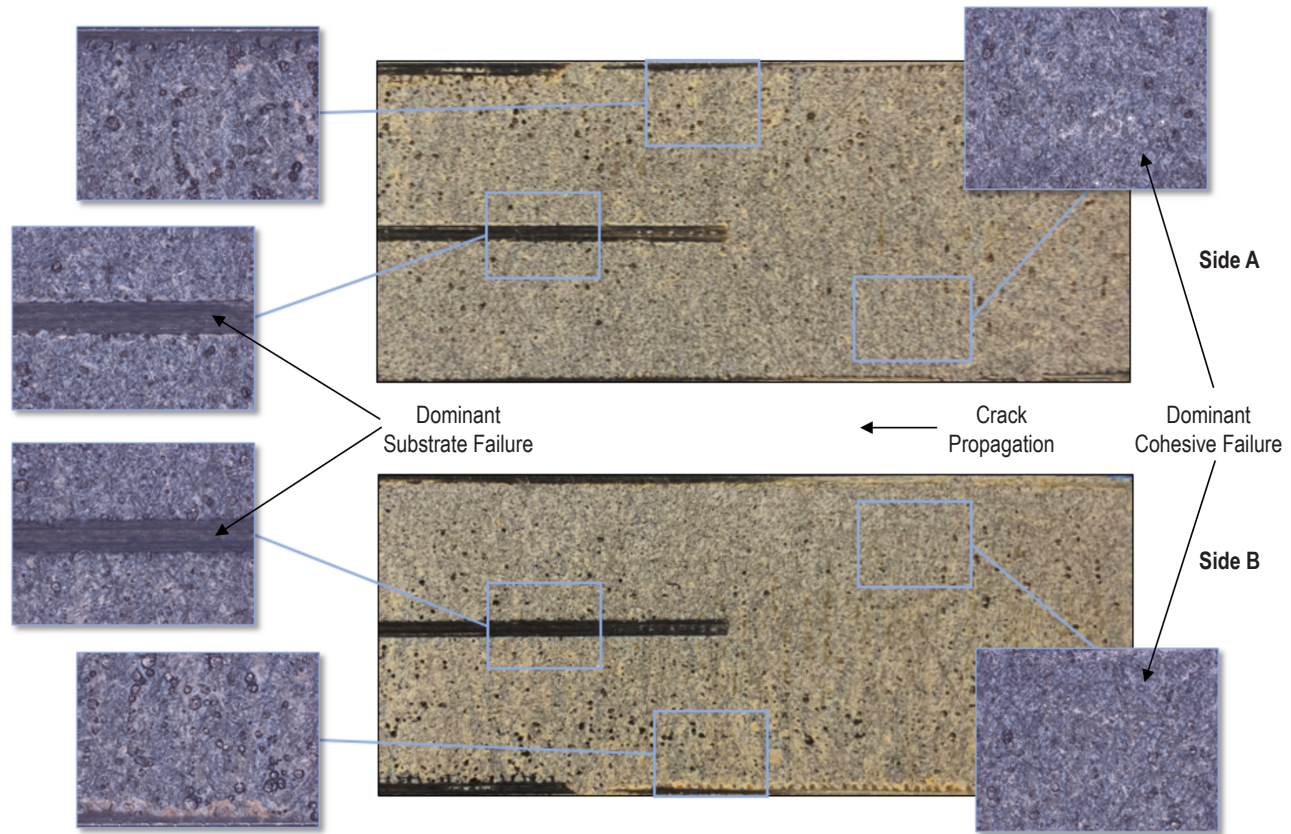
Detailed view of failure modes where failure occurred via combination of cohesive and substrate failure. Note that images show corresponding fracture surfaces (denoted as Side A and Side B) from a given test specimen.
